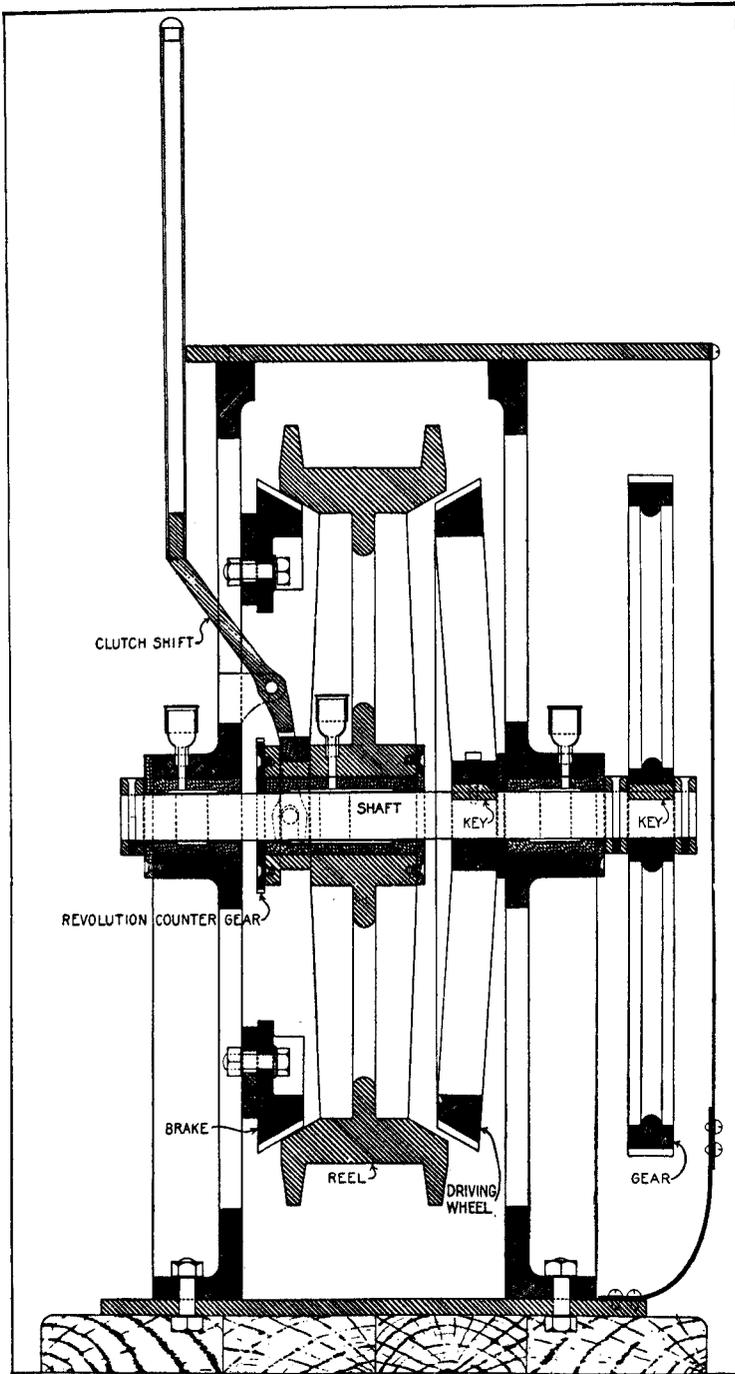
Deep-sea electric sounding machine (vertical section)
